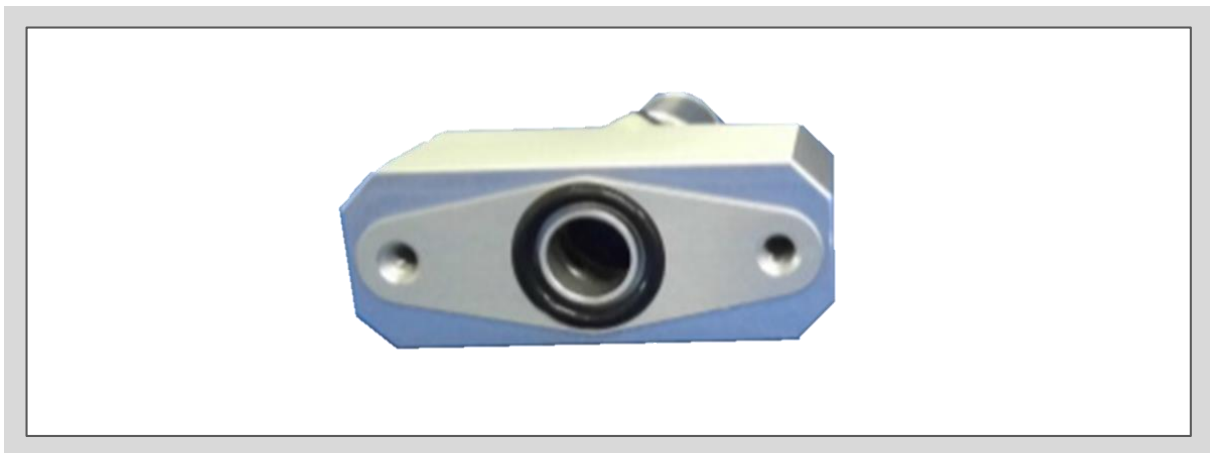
The image of assembled O-ring onto the flange adapter base
